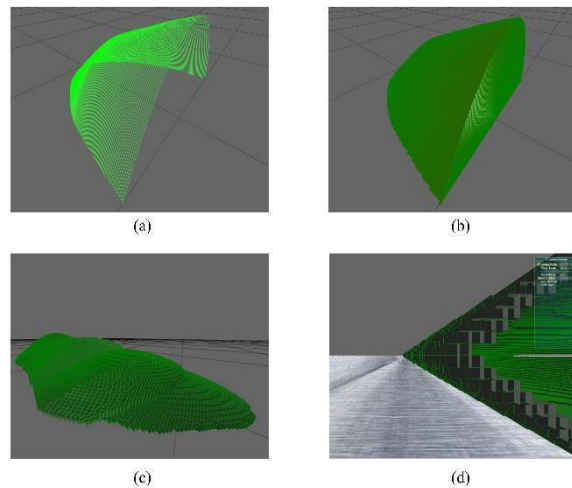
Parabolic and voxelized weld seam views (a) parabolic view, (b) voxelized view, (c) top view, (d) side view
